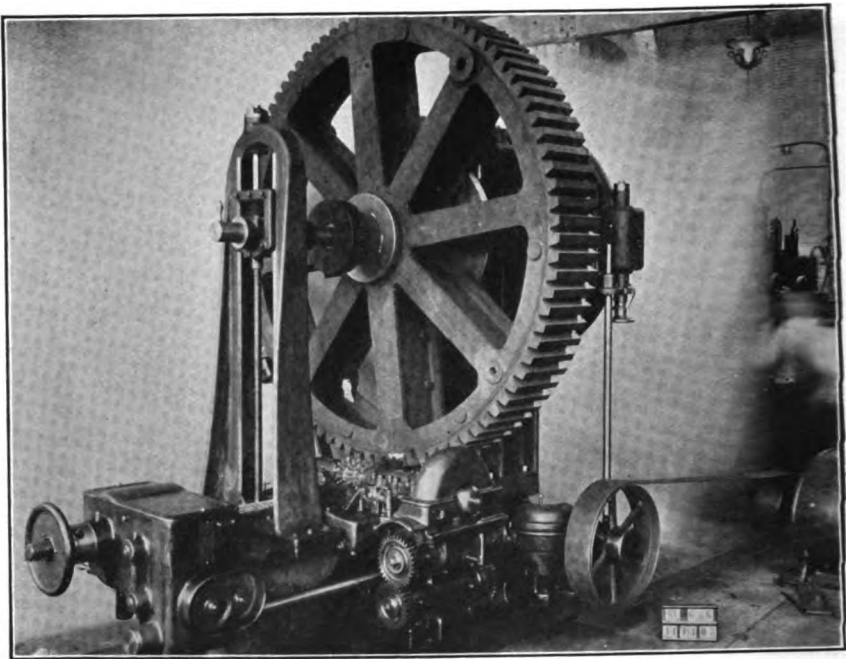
GOULD & EBERHARDT 84 BY 16 IN. NEW TYPE AUTOMATIC GEAR CUTTER.
